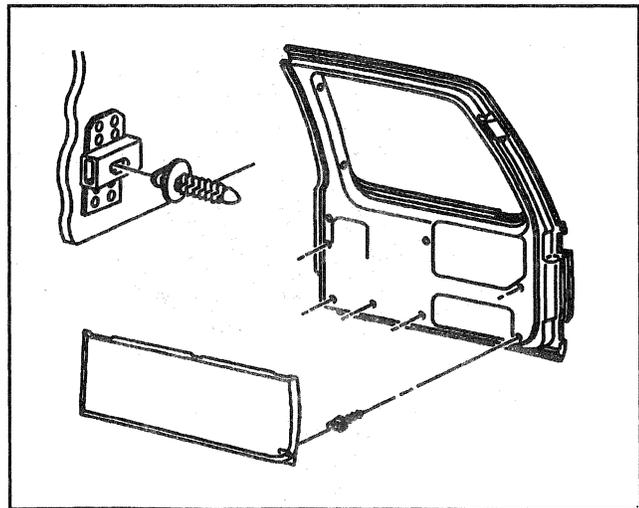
Rear Side Door Lock Actuator Wiring Connector and rivets
